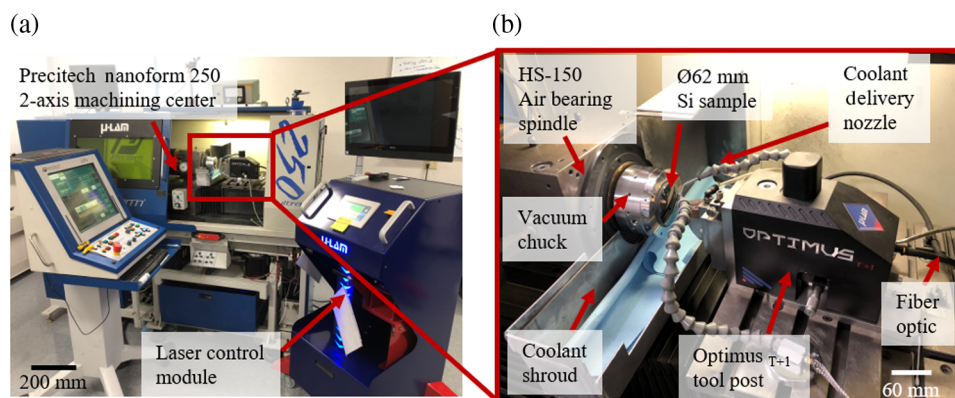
Experimental setup: (a) LCS integrated with Precitech two-axis machining center and (b) test bed with Optimus toolpost and Si sample.
